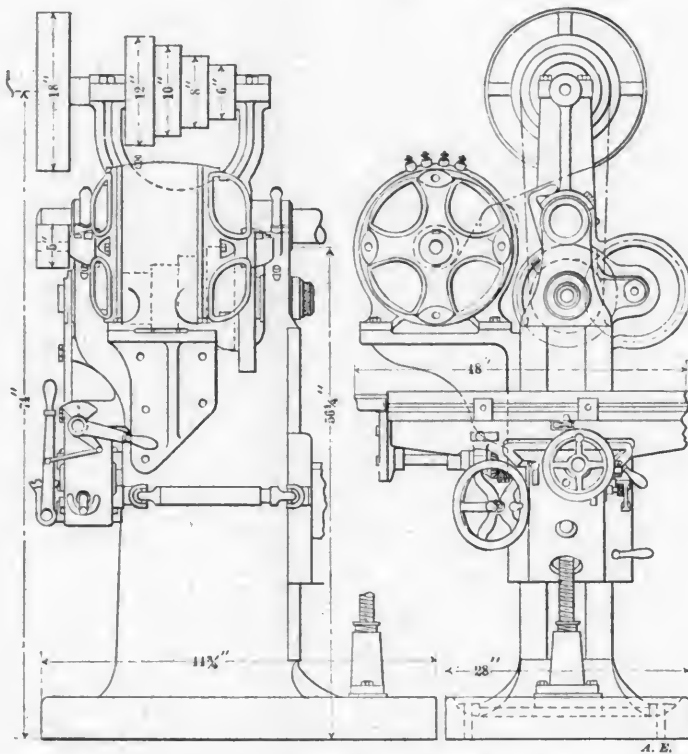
SIDE BRACKET DRIVE FOR A PLAIN MILLING MACHINE.
